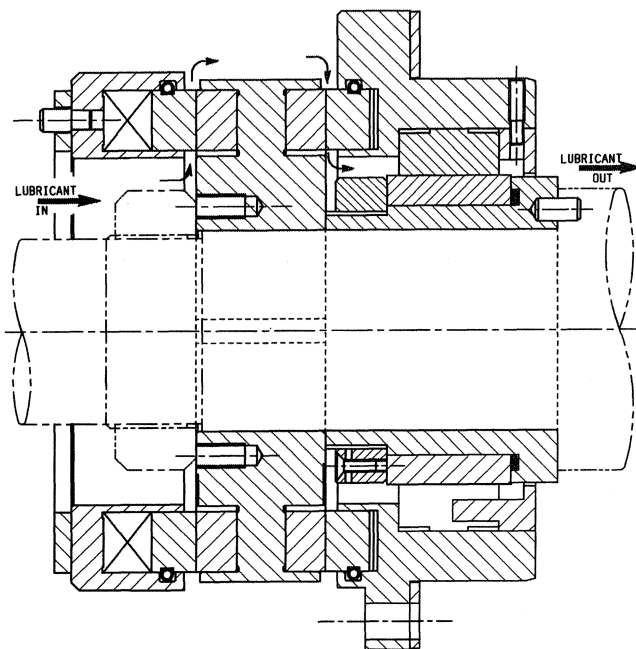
Combined Silicon Carbide Tilting Pad Axial and Radial Bearing Assembly.
